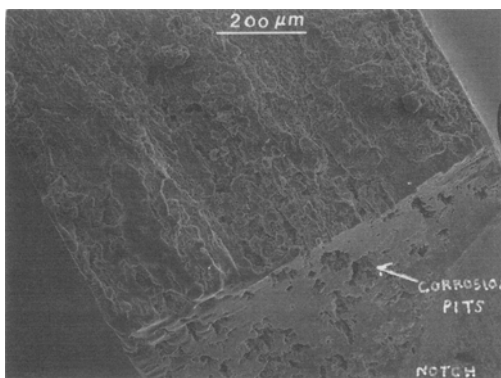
Enlarged view of the region inside the rectangle shown in Fig. 8, indicating corrosion damage at the notch and on the fracture surface adjacent to the notch (2024 bare). Magnification 100 \times .
